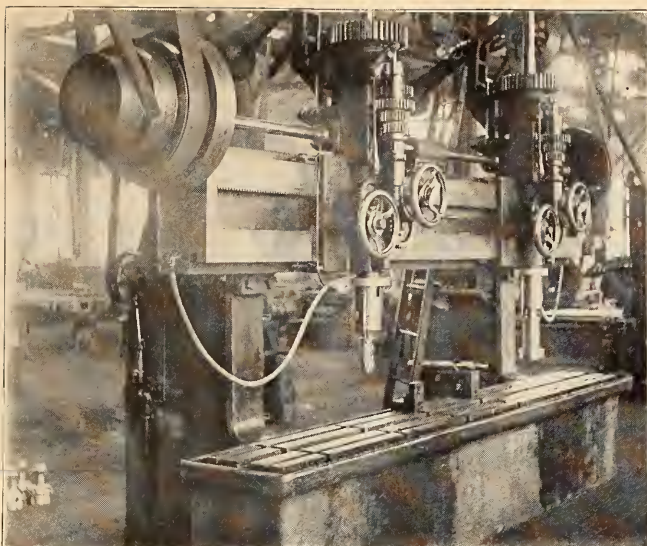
NILES-BEMENT-POND TWO SPINDLE ROD BORING MACHINE IN SECOND STORY OF C., M. & ST. P. RY. SHOPS.
